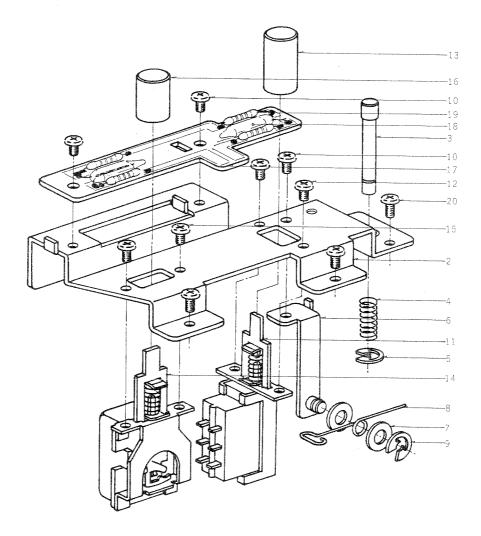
ILLUSTRATION OF IMPEDANCE ROLLER BLOCK
